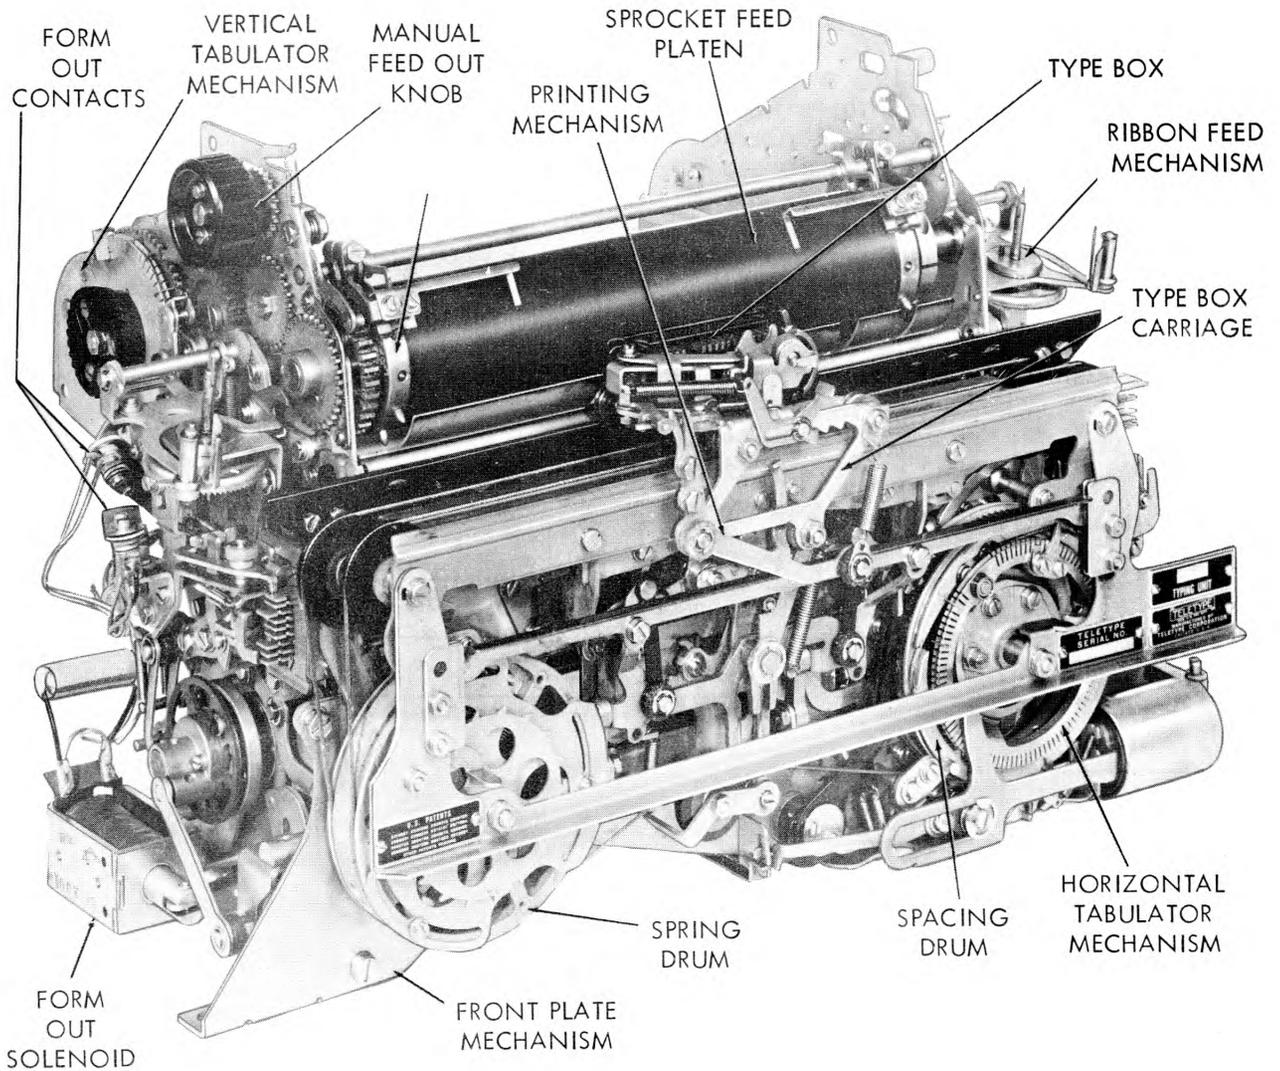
35 Typing Unit (Sprocket Feed) (Left Front View)
